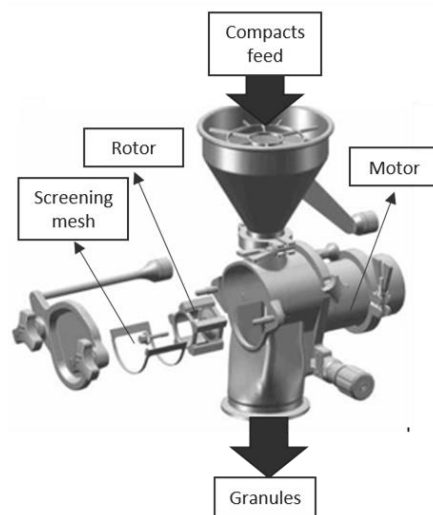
OscilloWitt Head assembly for milling compacts.
